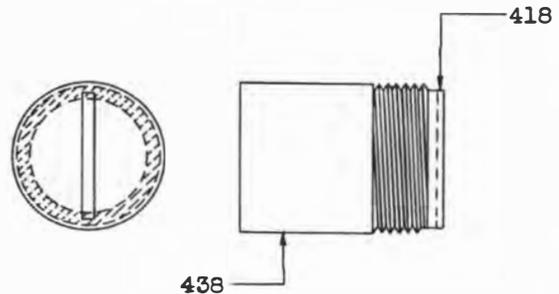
Where Roll Guard is Secured to Bearing Box Cover by Threads (Worm End)
